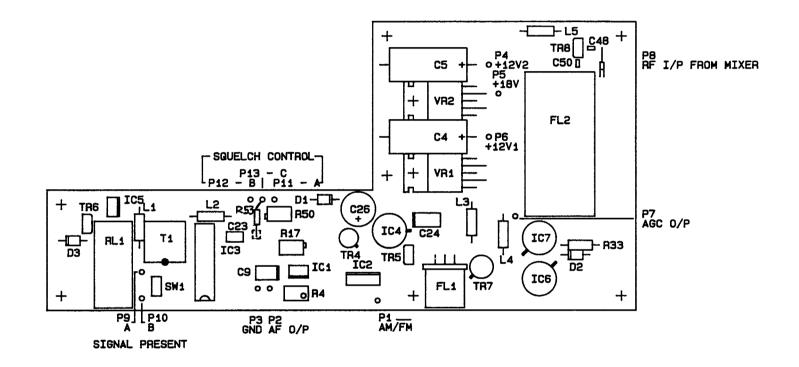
Receiver Module: IF Demodulator Board Side A Layout
